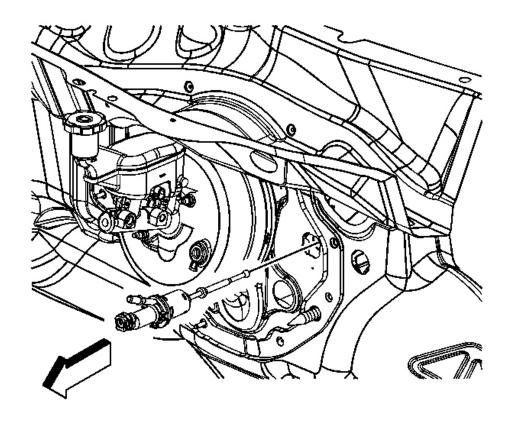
Clutch Master Cylinder Courtesy of GENERAL MOTORS CORP.
